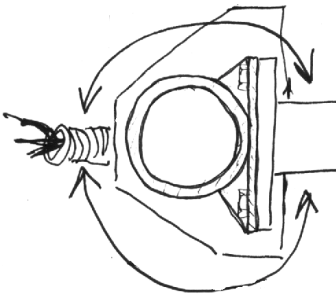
Wheel module and chassis mechanical interface (top view)
